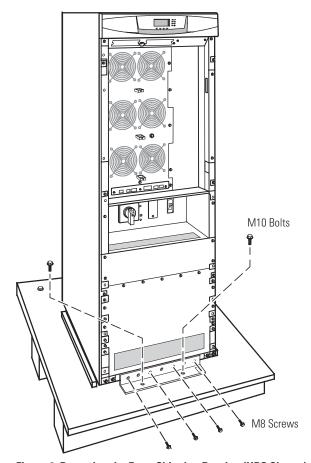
Removing the Front Shipping Bracket (UPS Shown)
